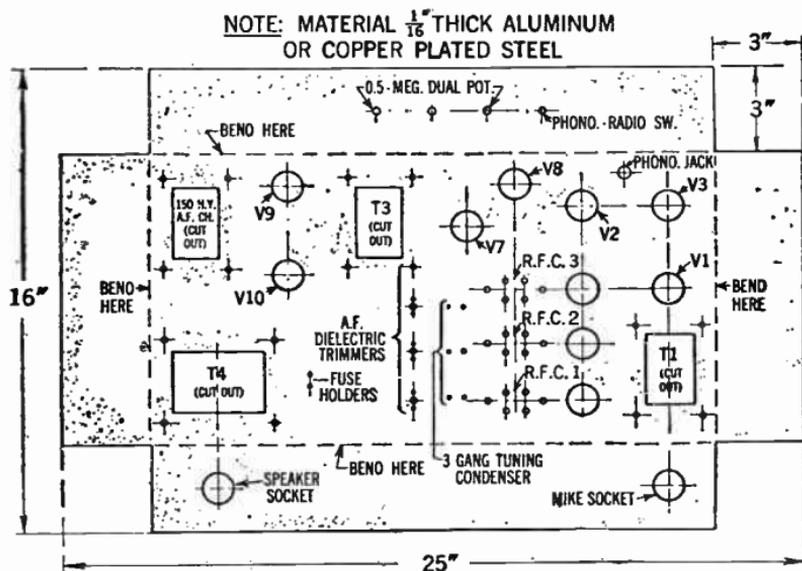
Example of a typical chassis size and drilling layout, showing location of parts.
